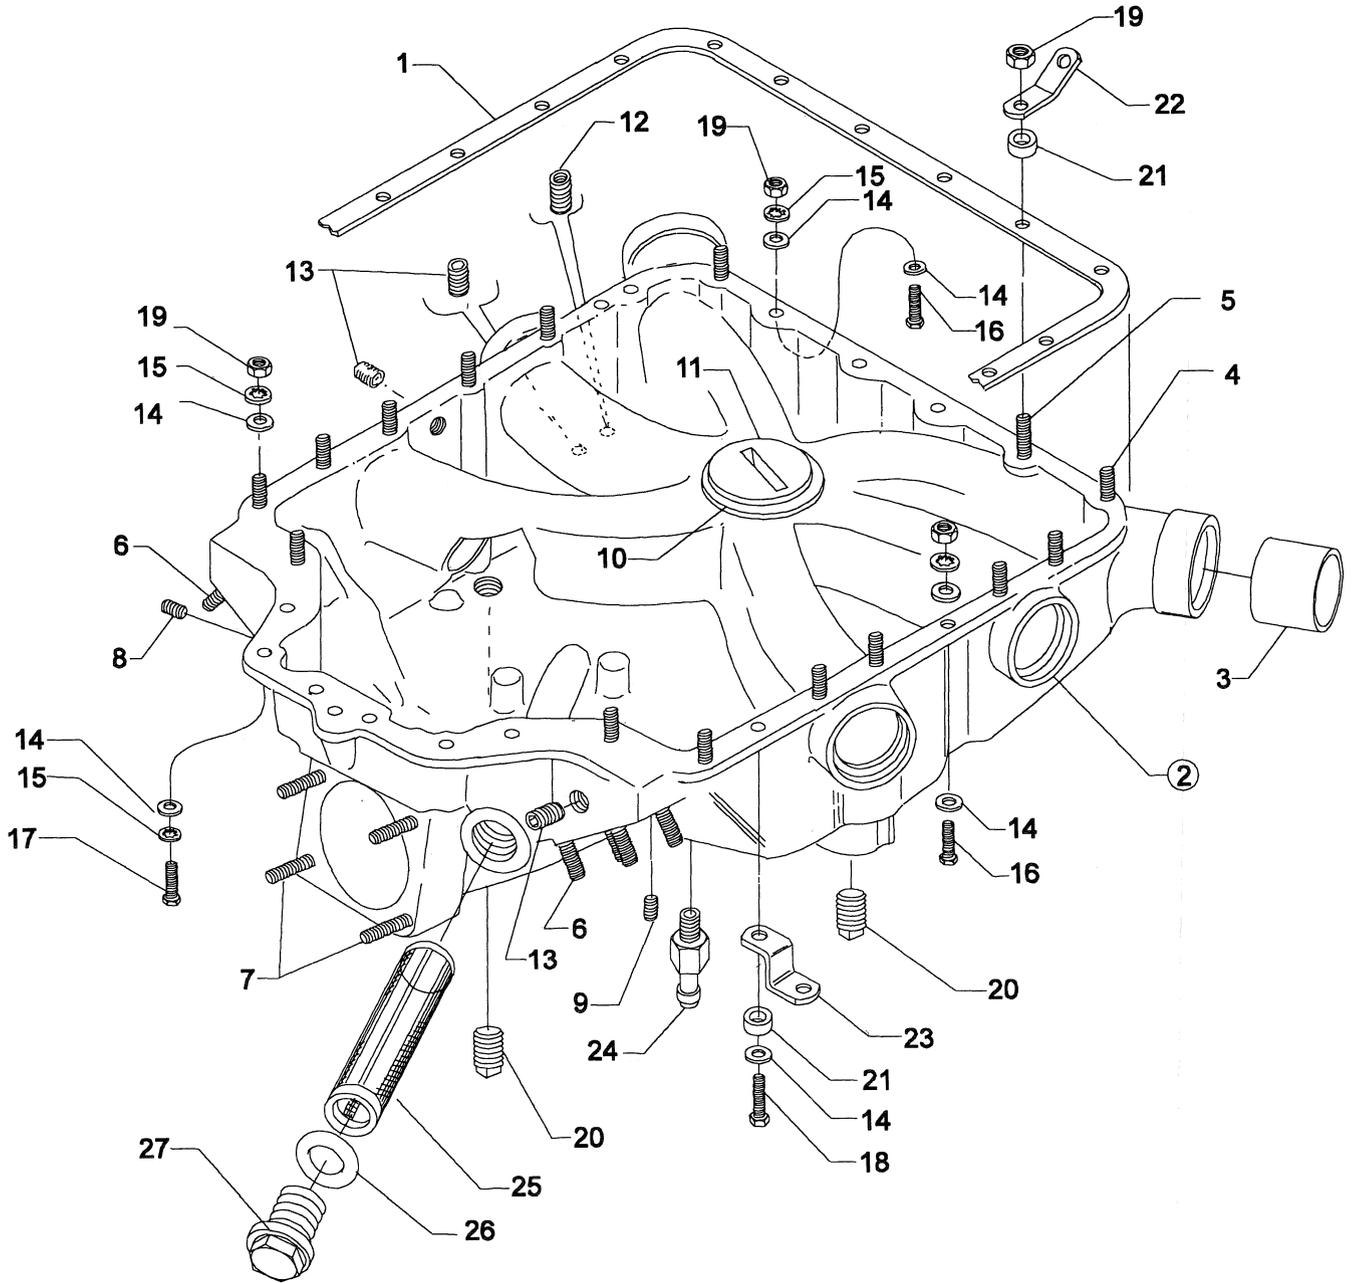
OIL SUMP ASSEMBLY AND ATTACHMENTS
